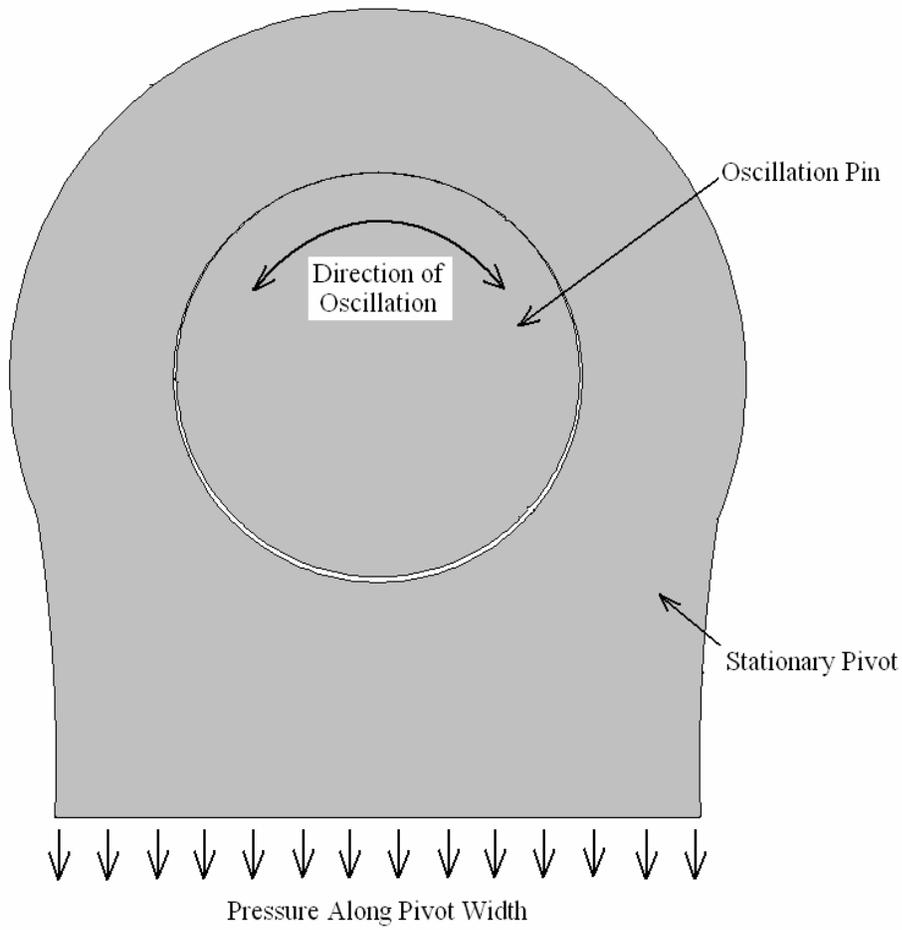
Oscillatory contact for a pin-pivot assembly.
